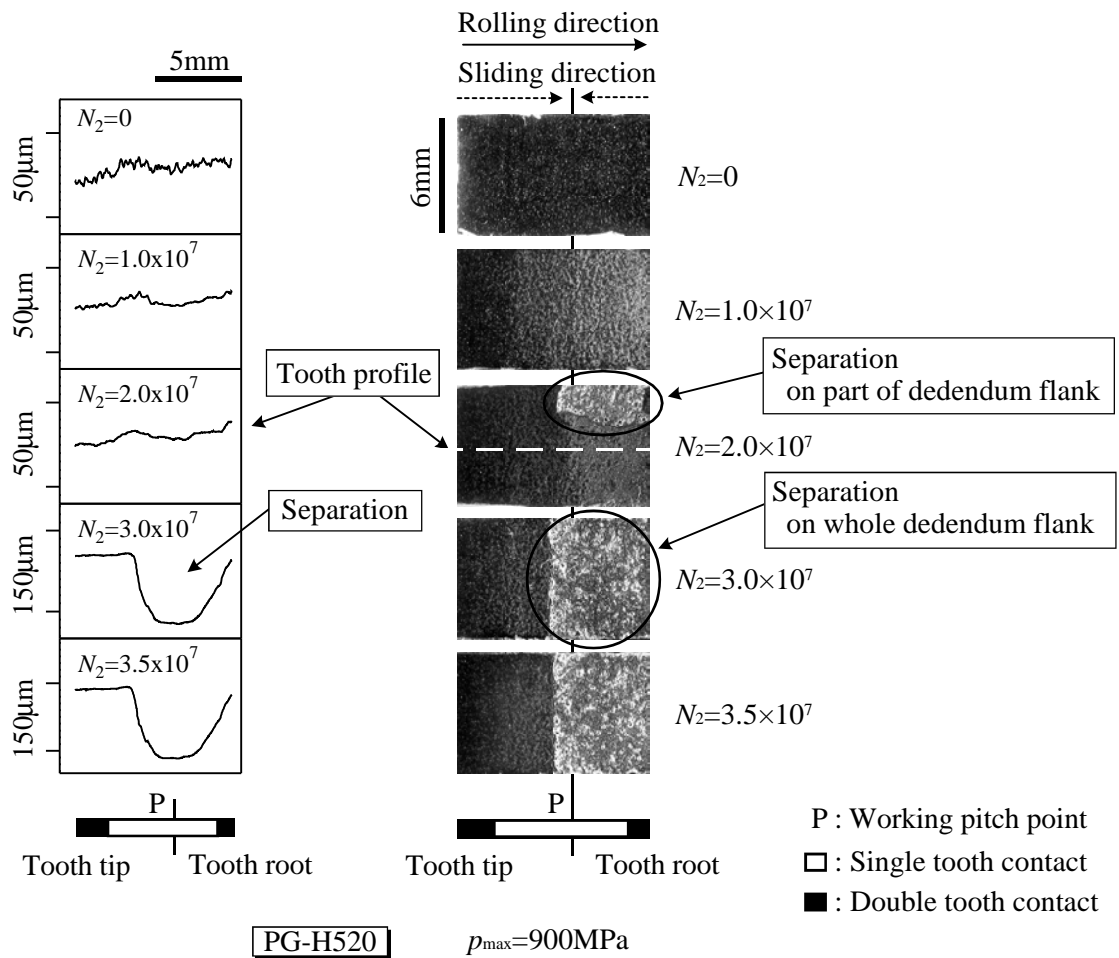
Tooth profile and tooth surface photographs of failed teeth during fatigue test
